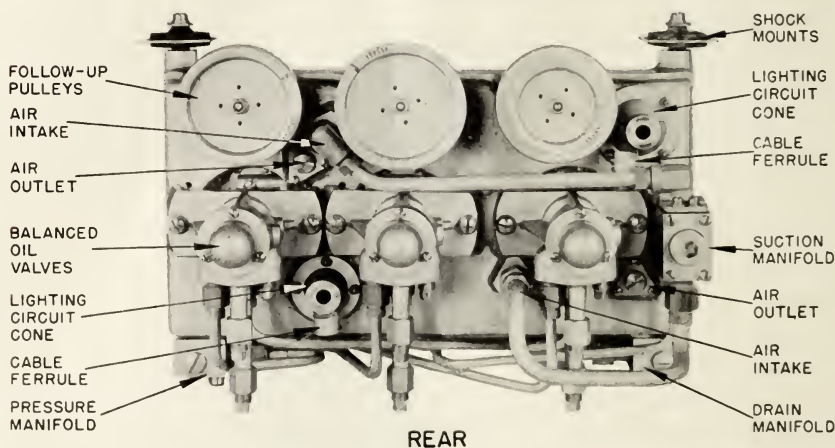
Gyro control units, rear, showing connections which engage with those on the mounting unit.
